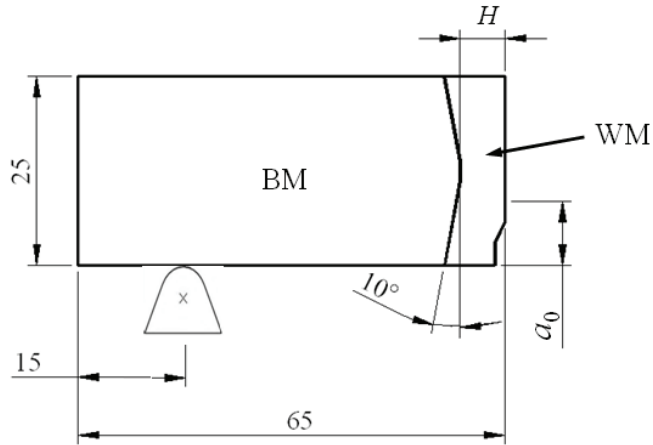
Dimensions of the SENB specimen and weld metal ($2H = 6, 12$ and 18 mm)
